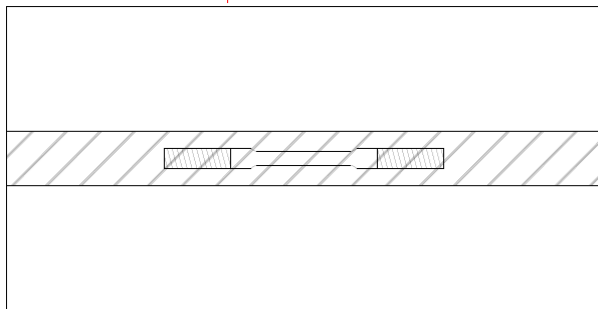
Sampling direction of monotonic tensile test specimen(weld metal)
